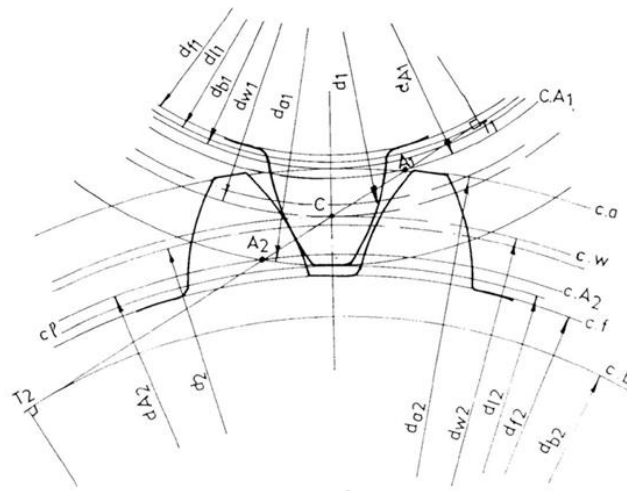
Geometrical characteristics of the set of helical gears—adapted ISO 21771:2007, (en) [6]
